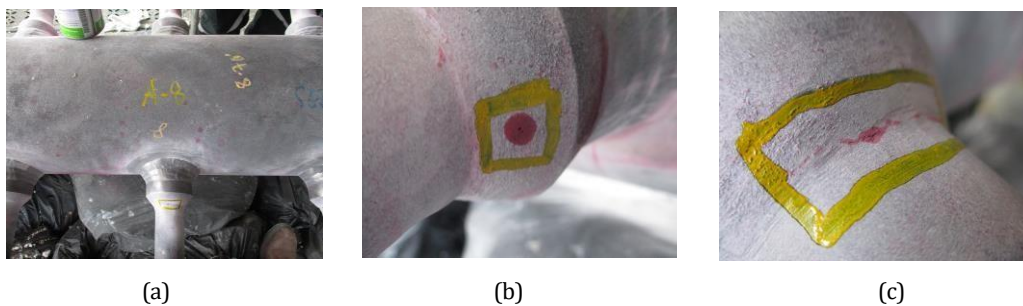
Hot collector weldolet of joint B, (a) general views, (b) showing the rounded crack of 6 mm and (c) with linear circumferential crack of 10 mm.
